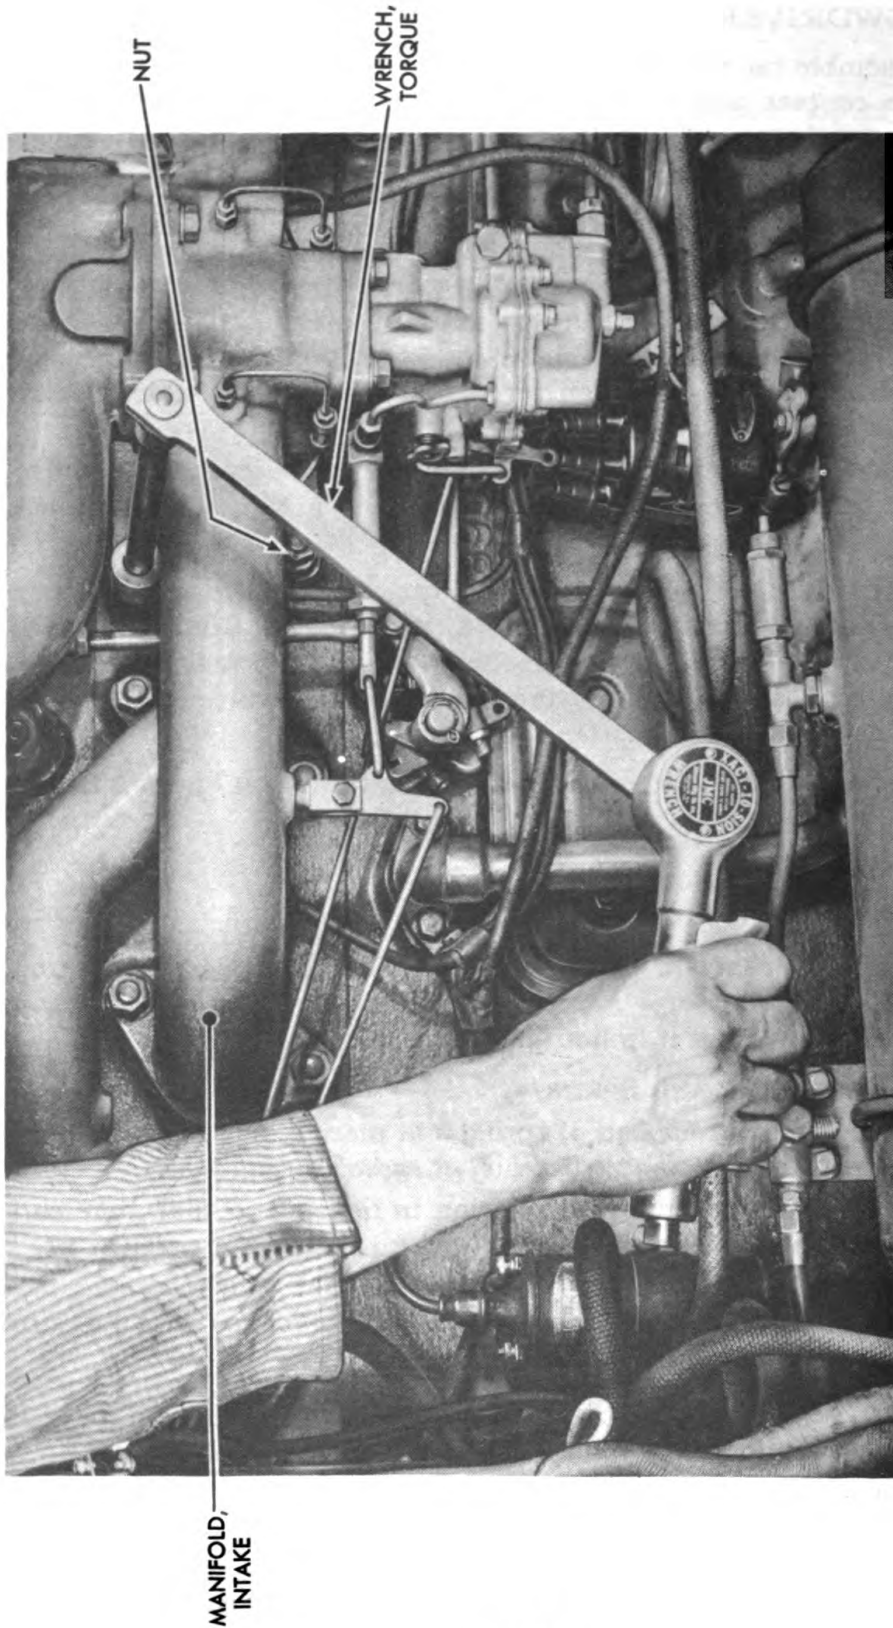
Tightening Intake Manifold Nut with Torque Wrench
